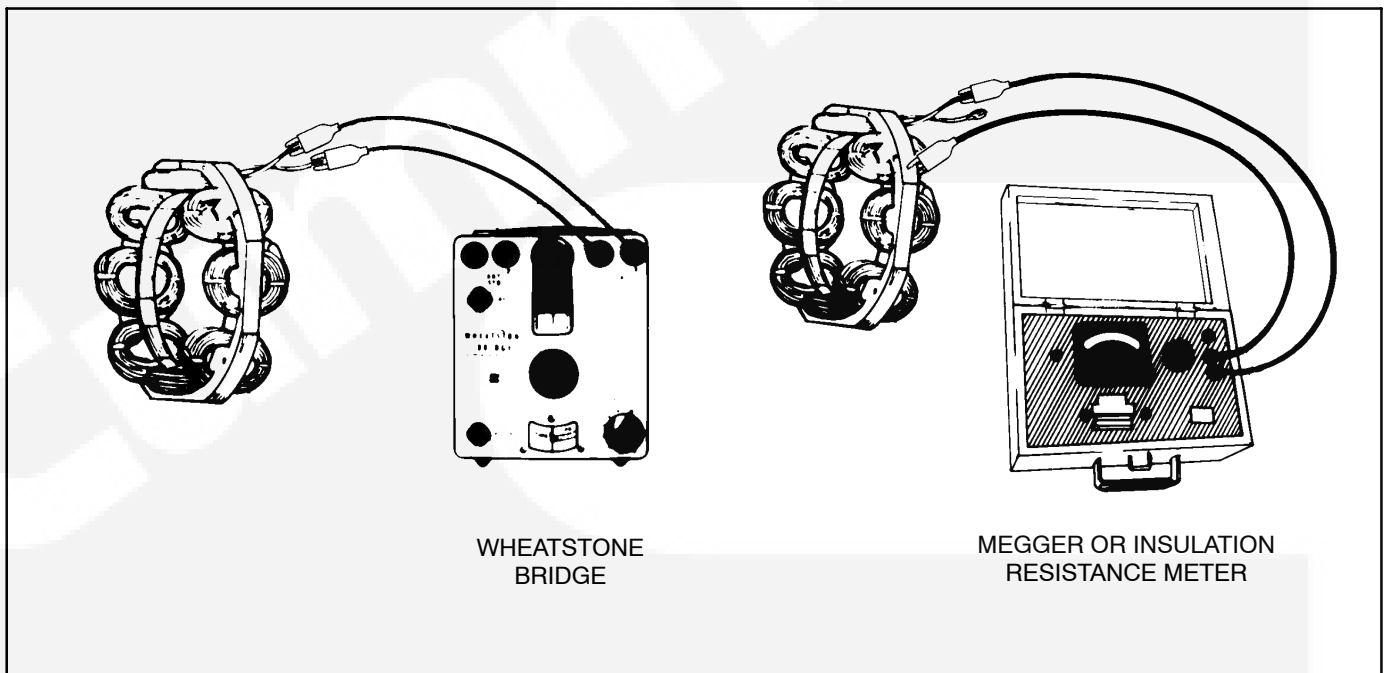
TESTING WINDINGS RESISTANCE
